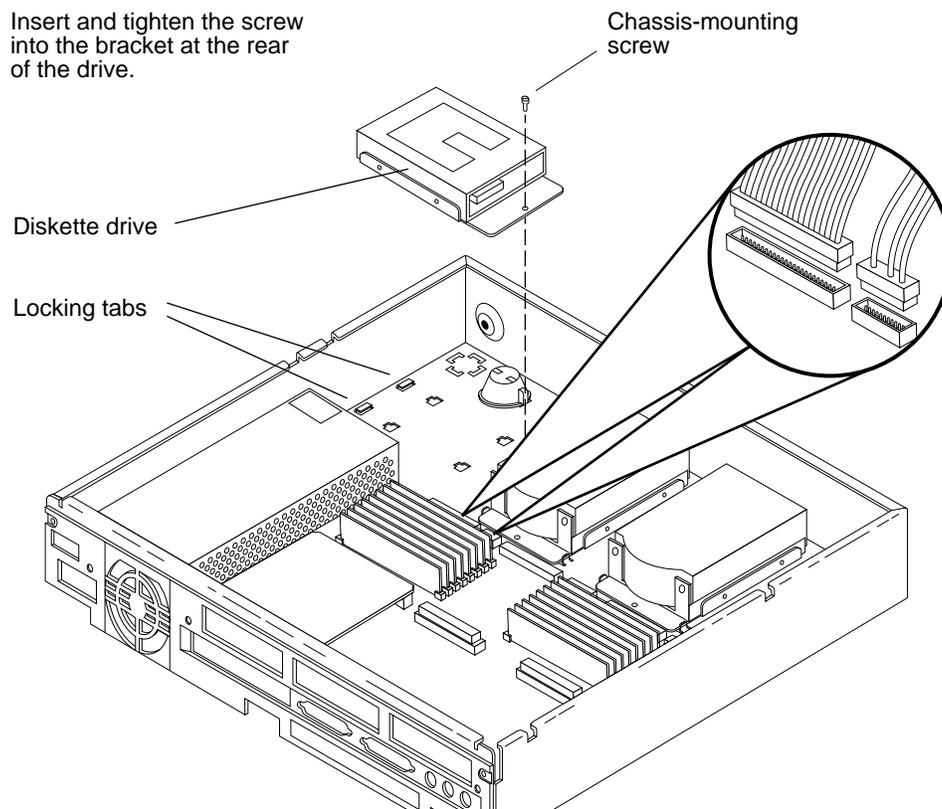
Removing and Replacing the Diskette Drive With a Metal Bracket
